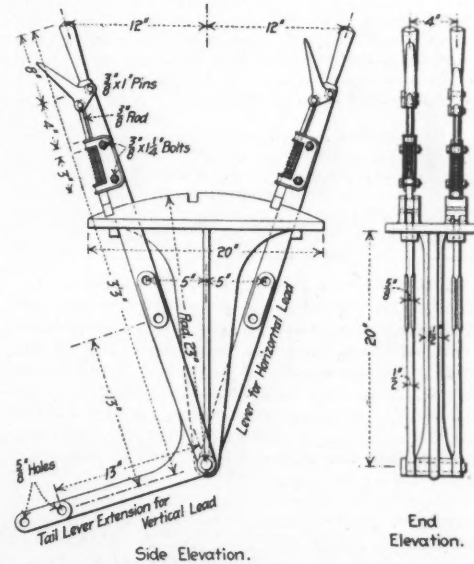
Table Lever Machine for Three-Position Block Signals; A., T. & S. F. Ry.
